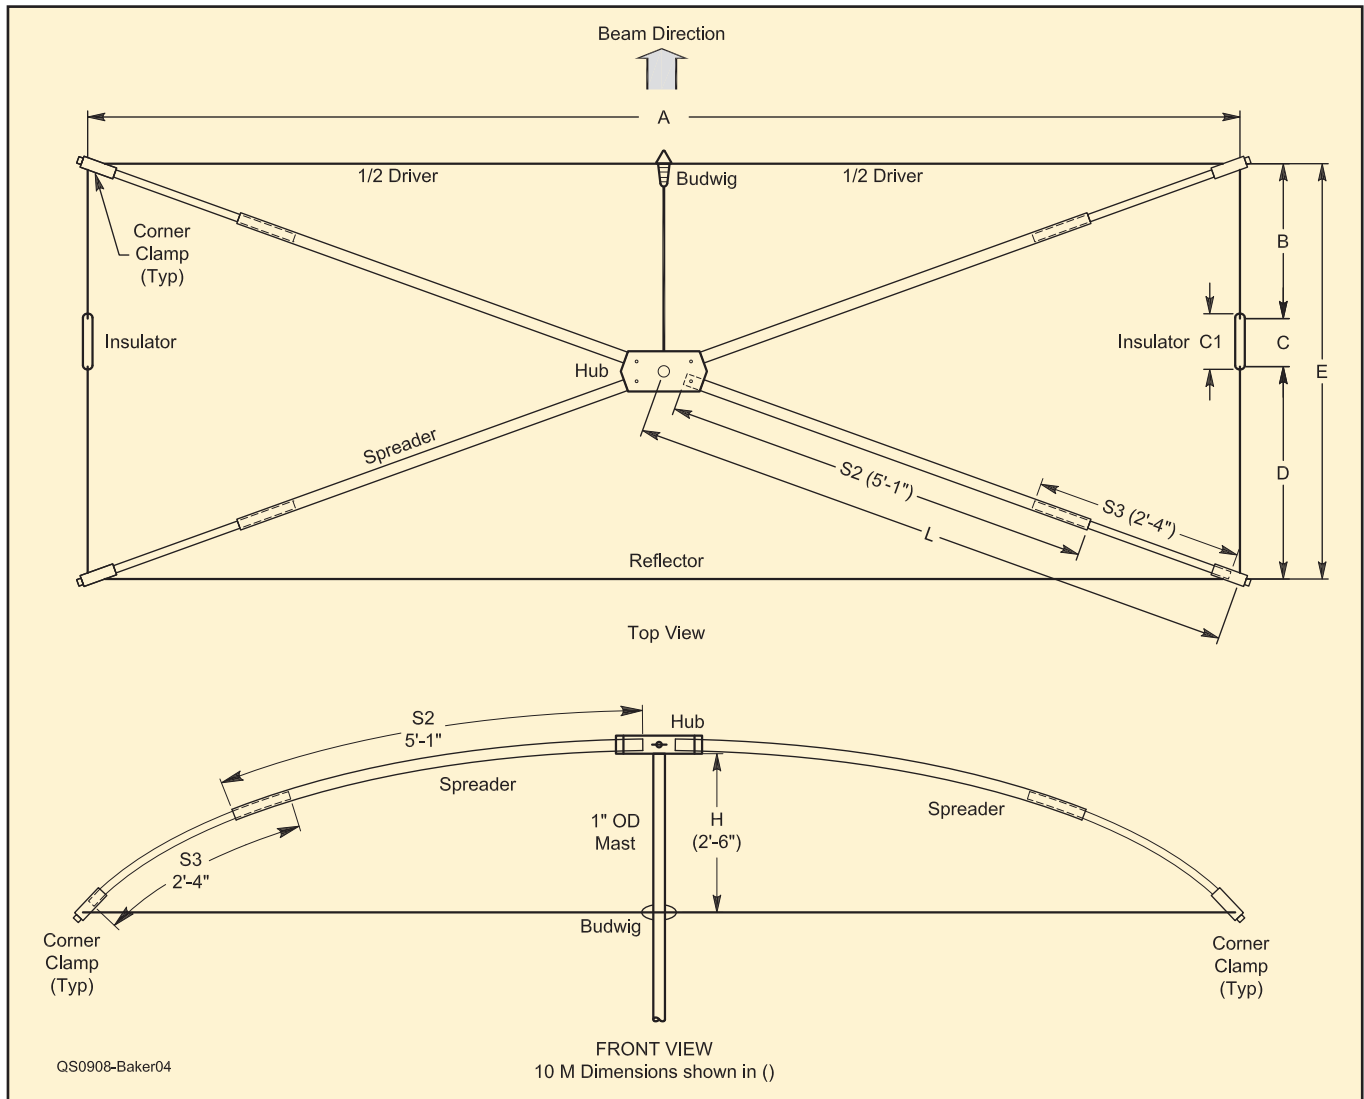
Dimensioned drawing of the 10 meter MoxBeam.
